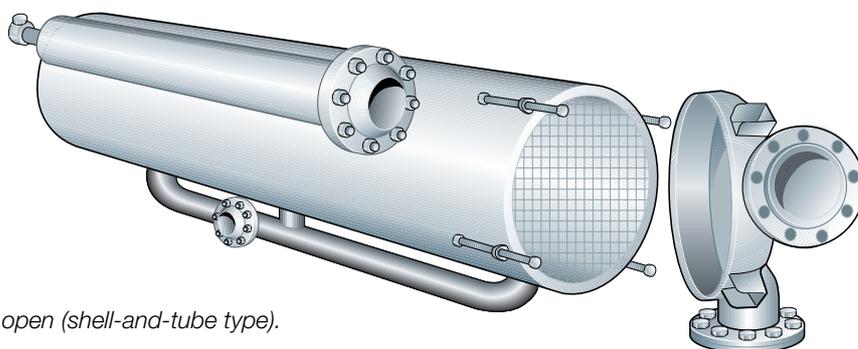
Tube condenser with front end open (shell-and-tube type).
